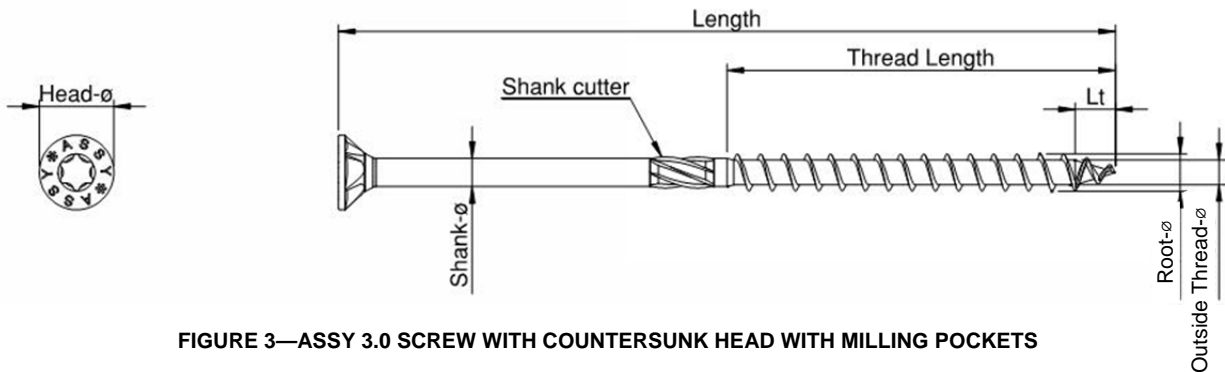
ASSY 3.0 SCREW WITH COUNTERSUNK HEAD WITH MILLING POCKETS
